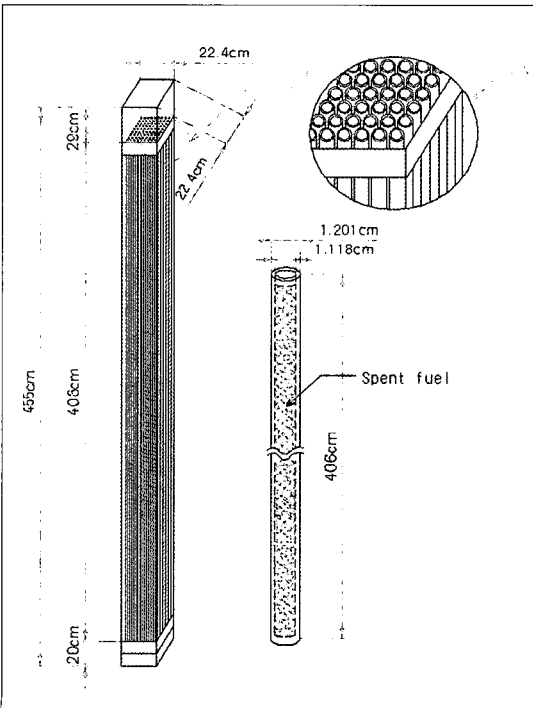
Spent nuclear fuel tube and basket type and dimension for PWR.
